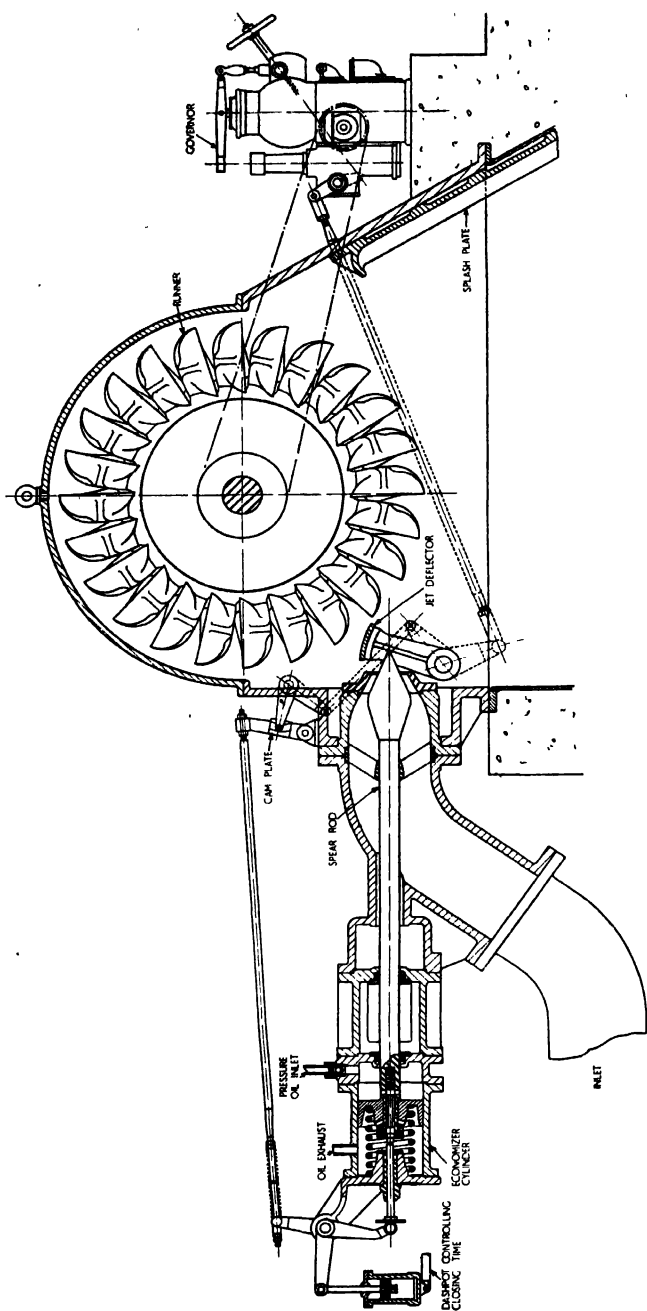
SECTIONAL DRAWING OF A TYPICAL SINGLE-JET PELTON WHEEL
